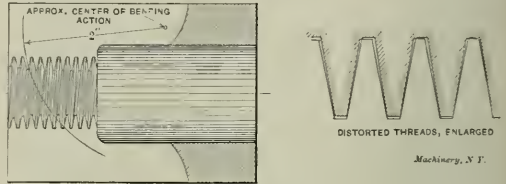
Spring Screw Die with Special Threads, and Threads Distorted by Common Adjusting Method.
